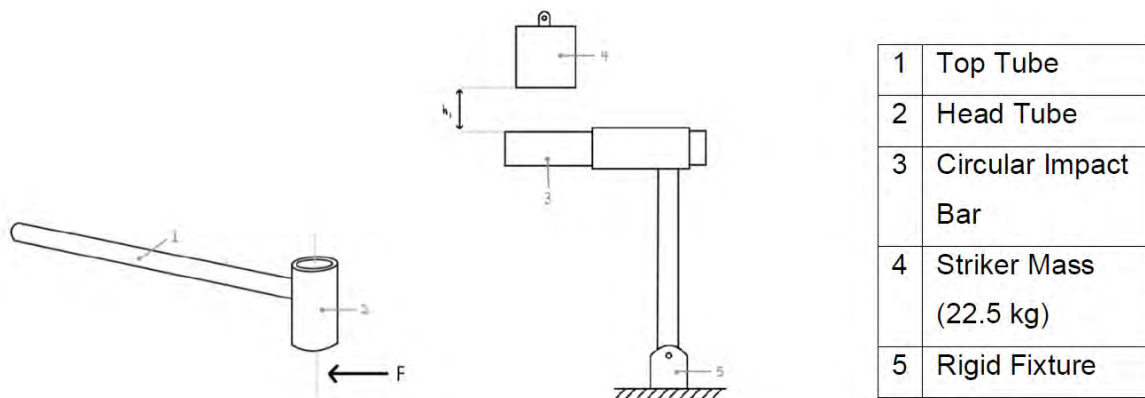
The top tube impact fracture test. (Hales, Nag, Chabra, Cheng, & Huang, 2021)
